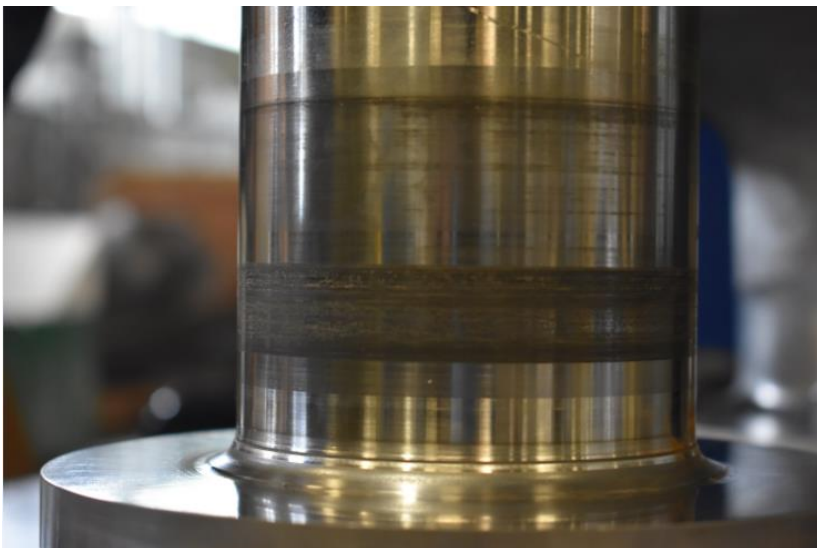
Shaft showing rub marks at journal bearing location when tested with WC bearings
